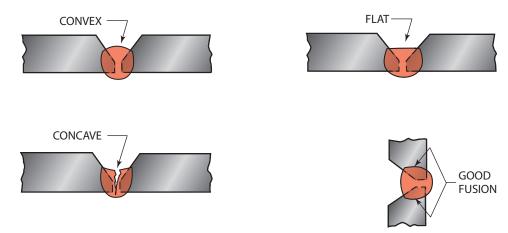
Concave tack welds may crack because they cannot withstand the stresses during cooling.
